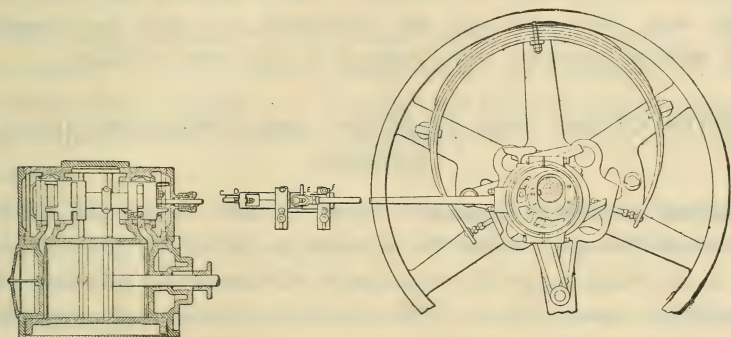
A sectional cut of McIntosh and Seymour high-speed engine, showing valve and governor.
